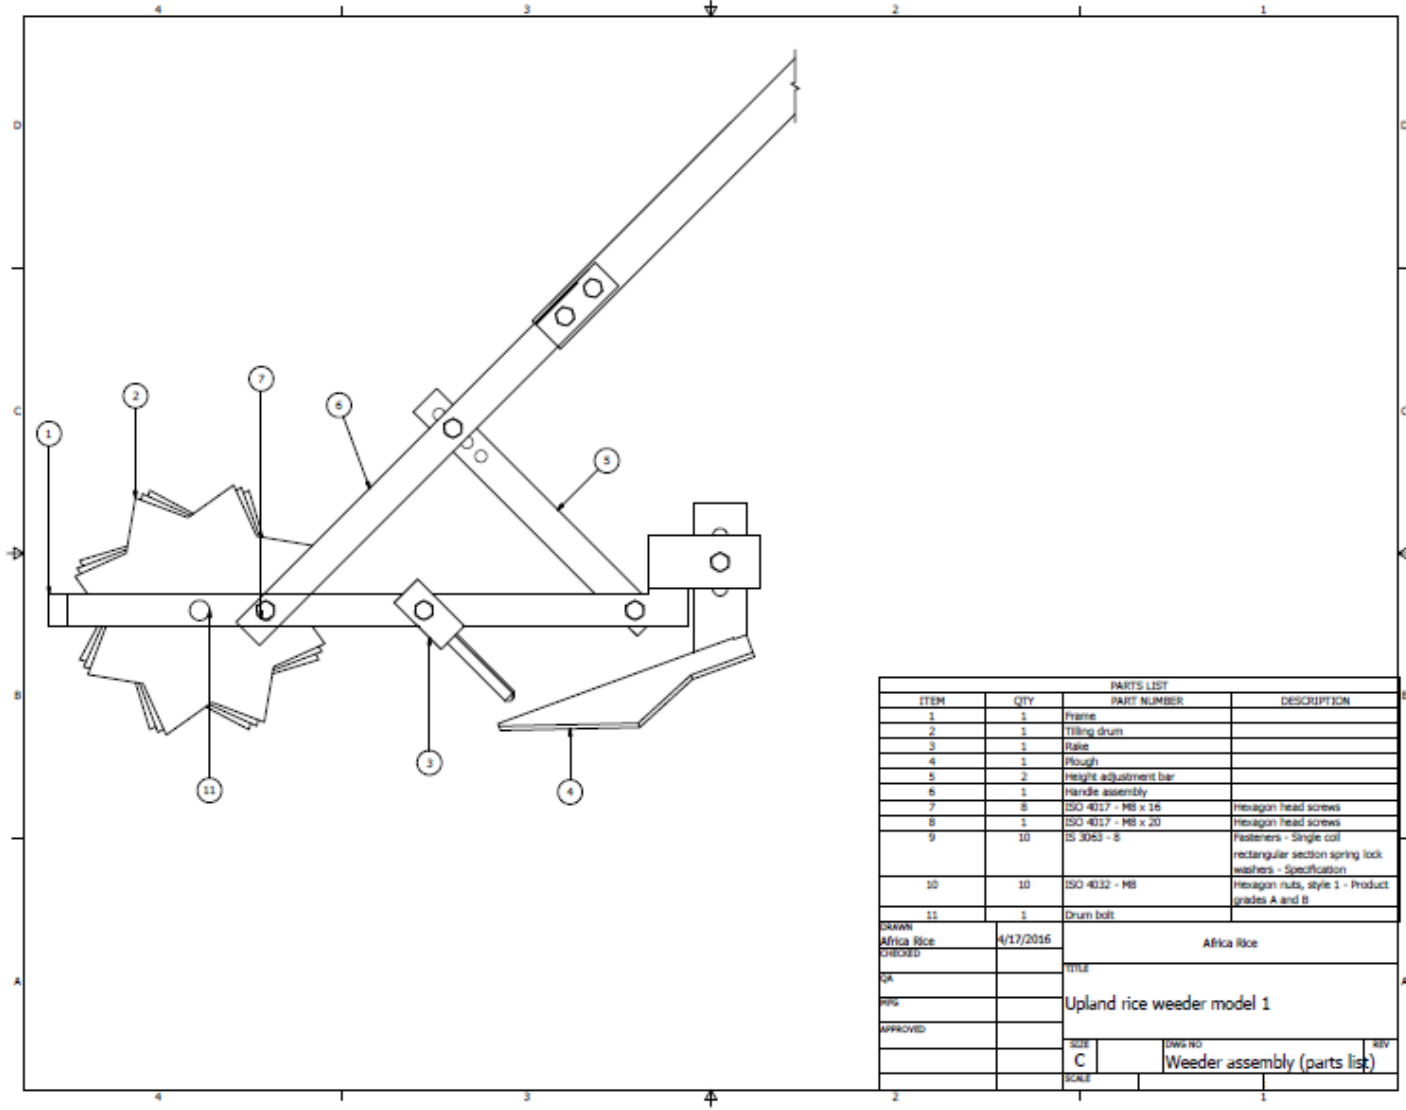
Pictorial view of weeder assembly (Handle incomplete)
